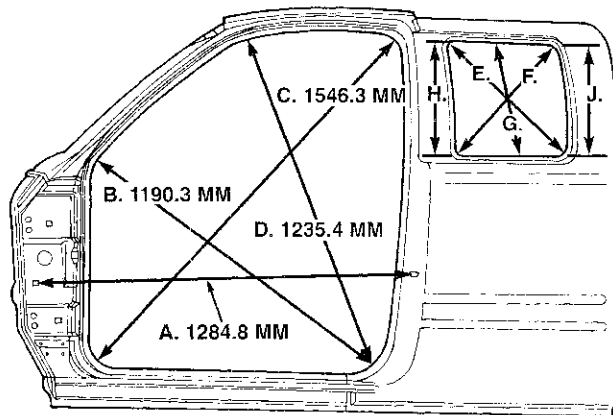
Body Dimensions—Front ViewLH SIDE VIEW
